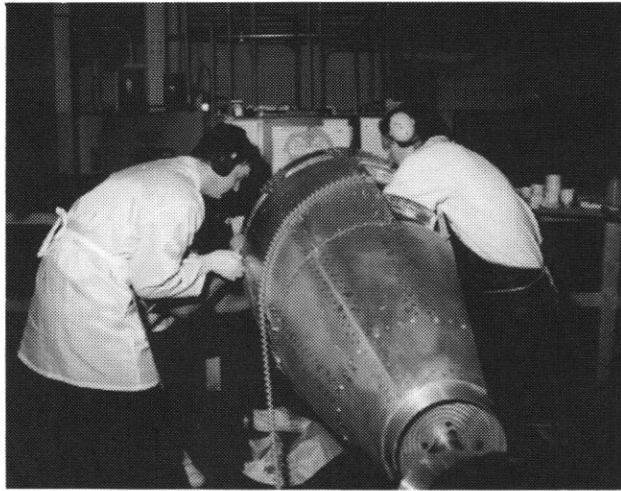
Fitting and aligning frames and stringers using the assembly fixture.
